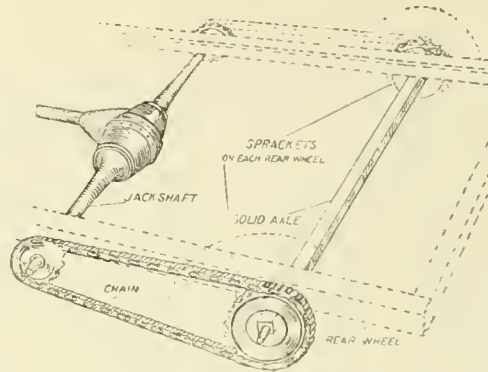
Double-chain drive. The motor-shaft ends in a jackshaft which transmits the power to sprockets connected by chains
